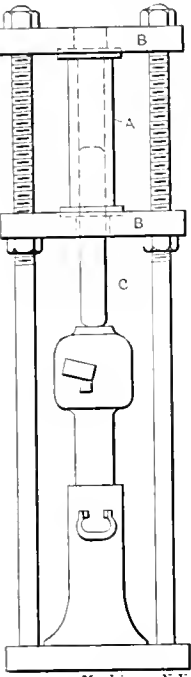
The Press equipped with a 10-ton Hydraulic Jack.
